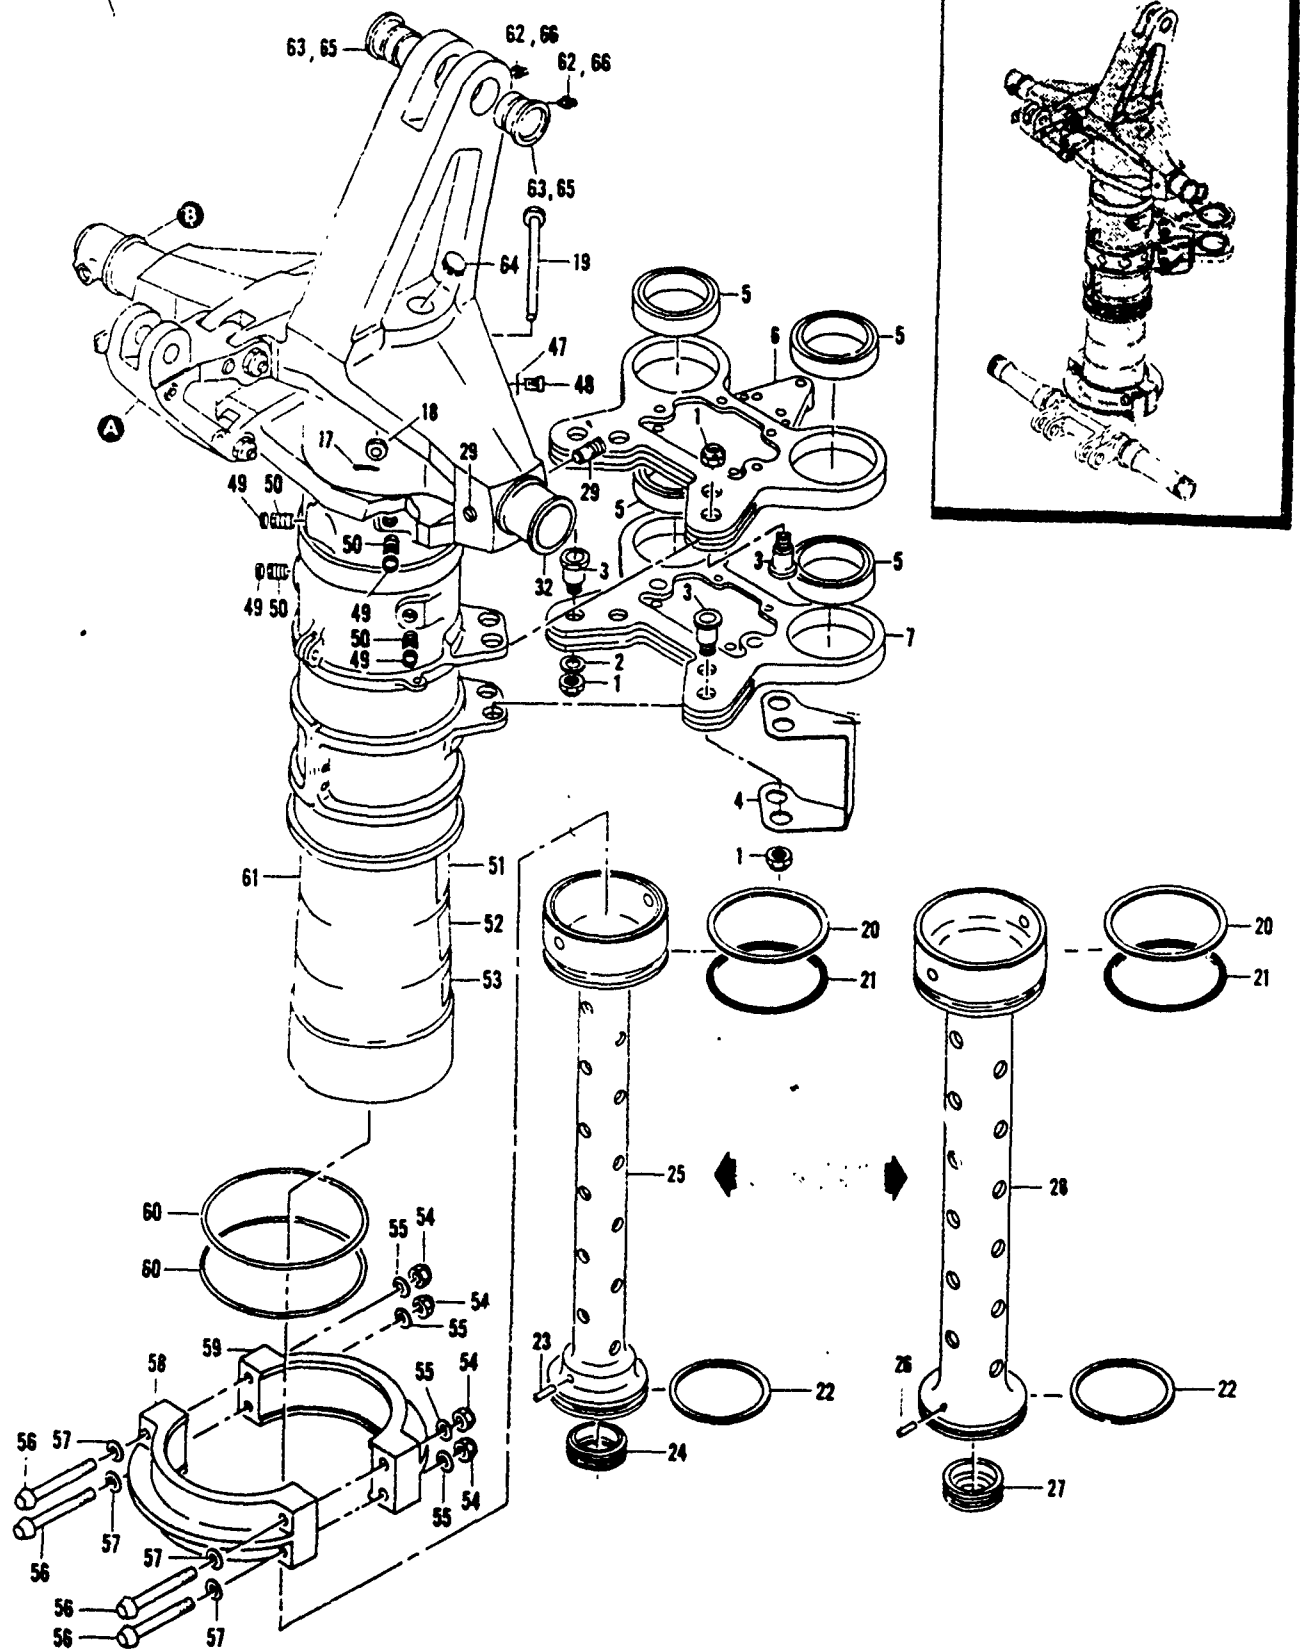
Nose Gear Outer Cylinder Assembly (Sheet 1 of 2)
